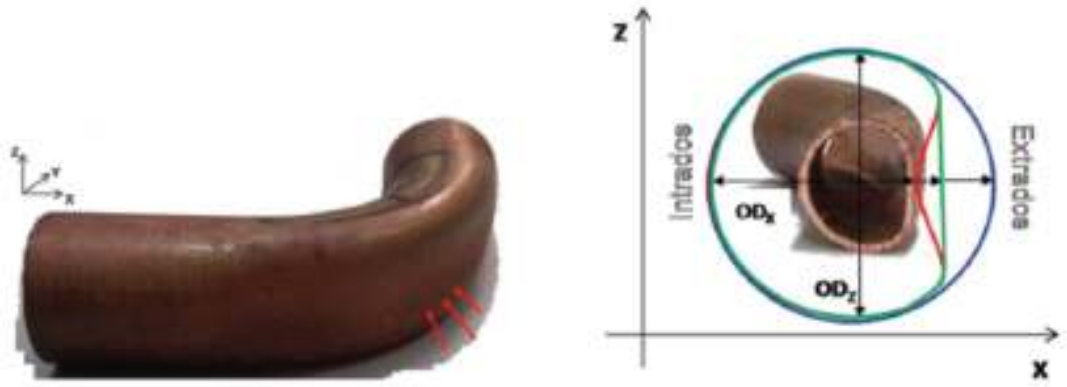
(a) Collapse on the extrados (b) Cross-section flattening [20]
